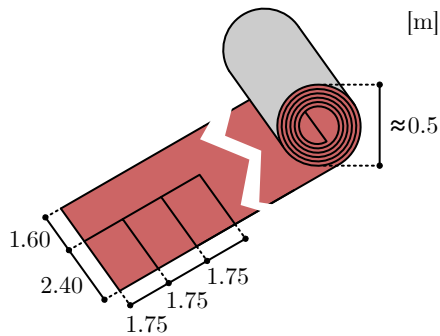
Carpet roll dimensions and how each piece of carpet was cut from the roll.
